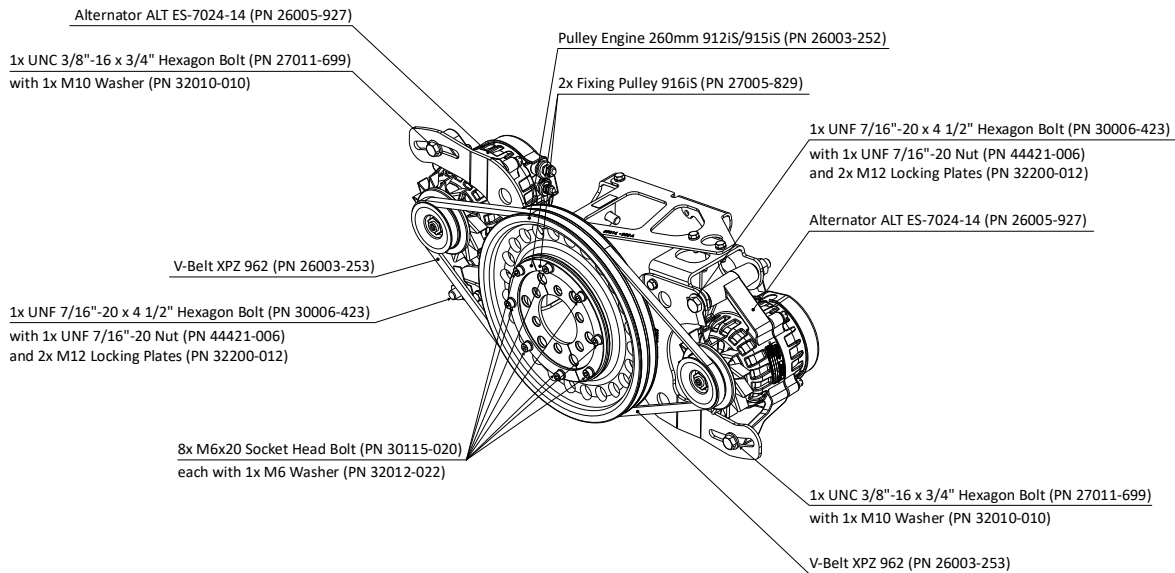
Isometric View Ext. Double Alternator Kit 2x 70A Rotax 916iS
